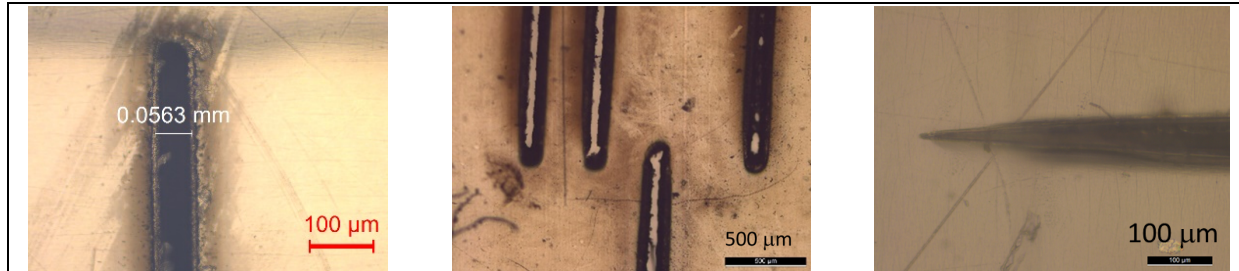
(Left) Good laser cut sample. (Middle) Defected laser cut samples. (Right) Board-cut sample.
